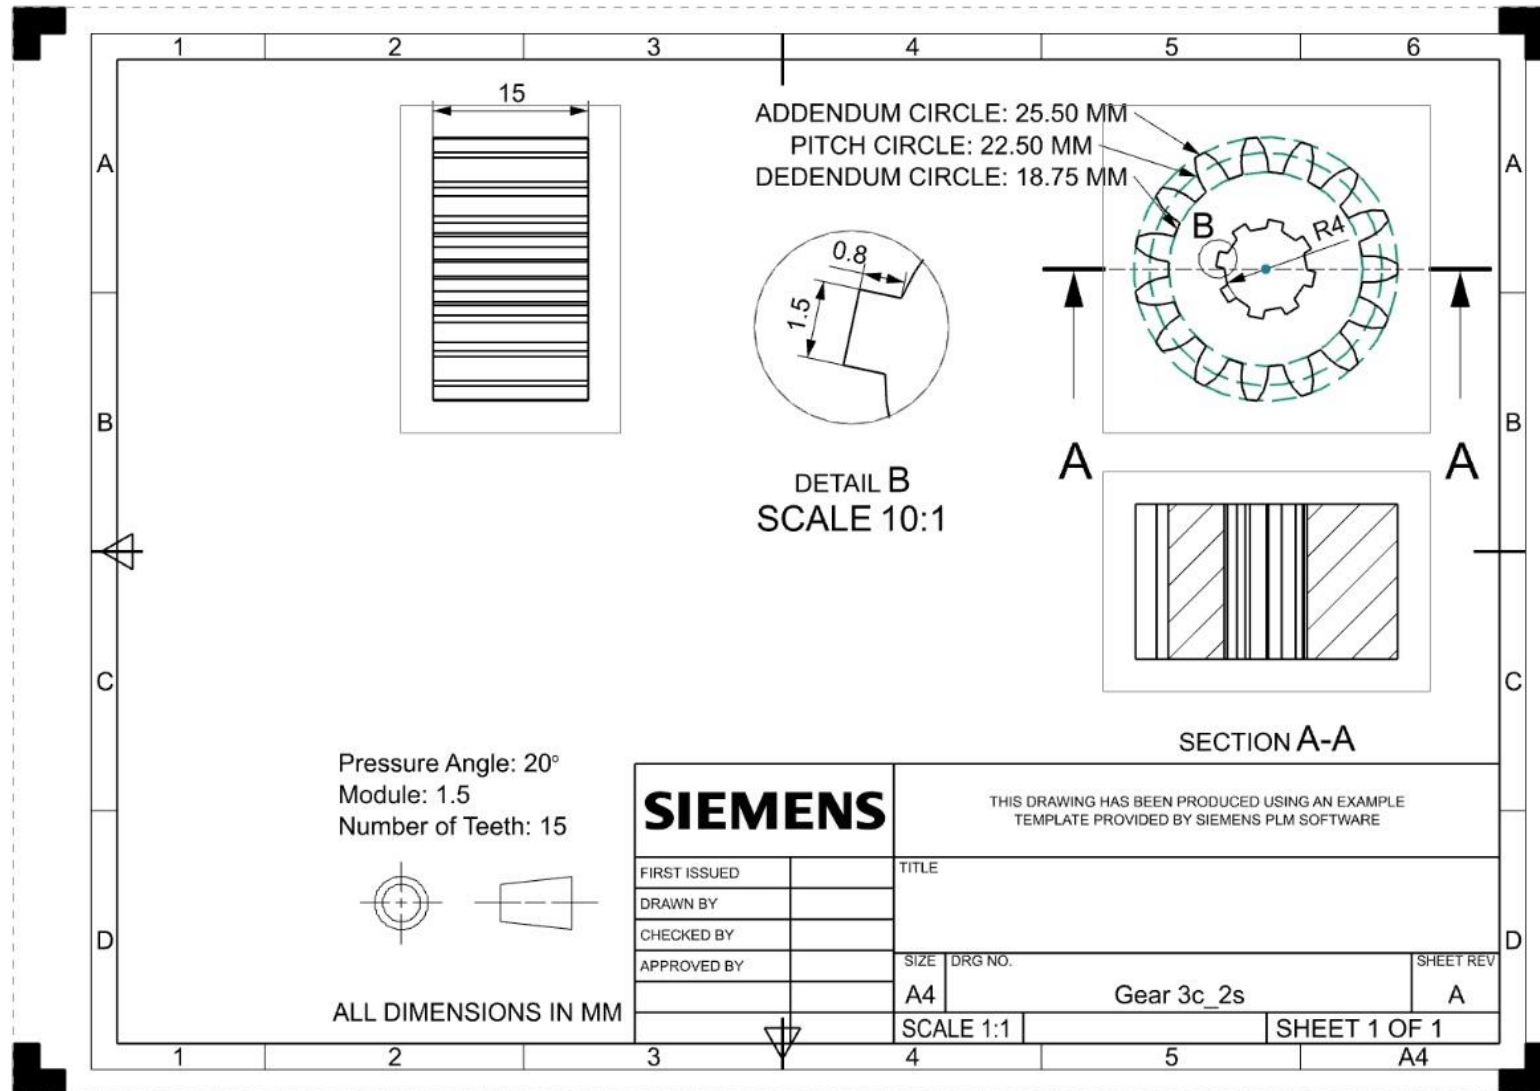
Detailed drawing of the 22.5 mm pitch diameter, 15 mm face width gear.
